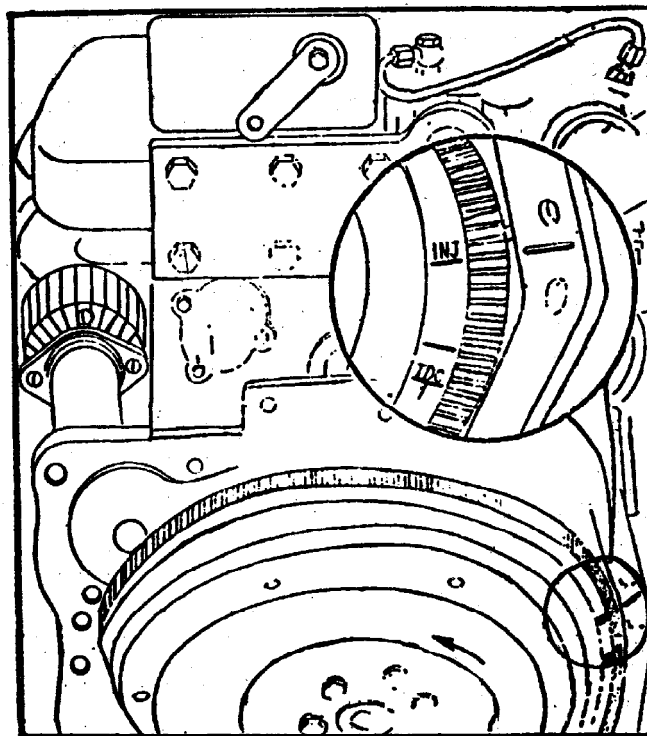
The flywheel position at the beginning fuel supply of 1st cylinder
